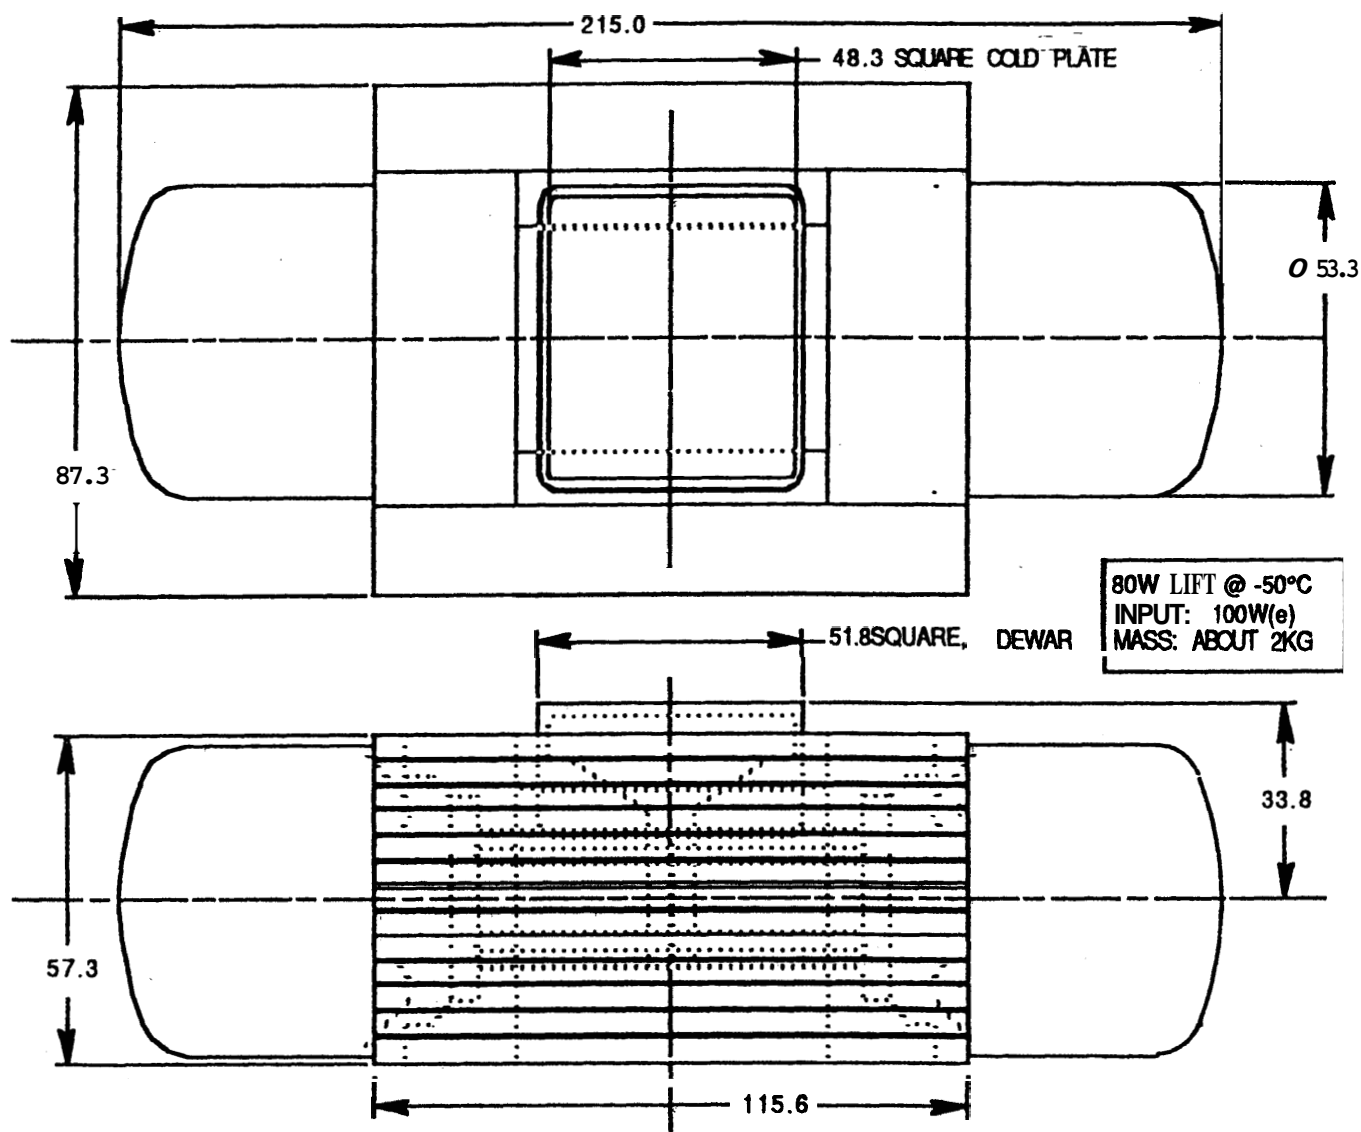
Miniature free-piston Stirling cooler capable of lifting 80W at -50°C with 100W input (dimensions in mm).
